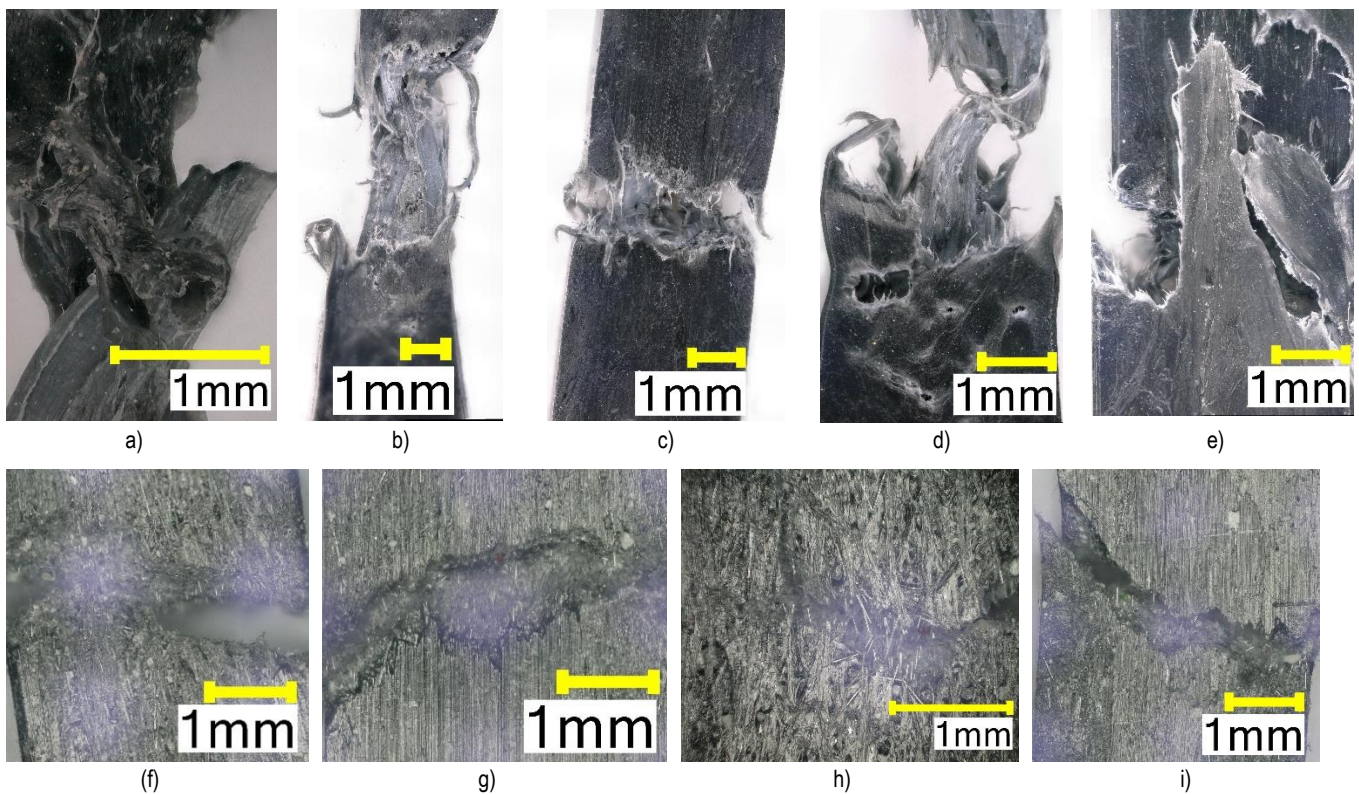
Failure locations of specimens after the tensile test: a) rHDPE; b) B40; c) B60; d) B80; e) B100; f) A40; g) A60; h) A80; i) A100
